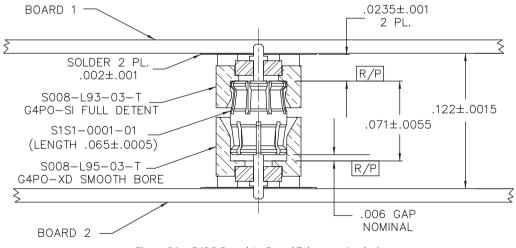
G4PO Board-to-Board Tolerance Analysis
